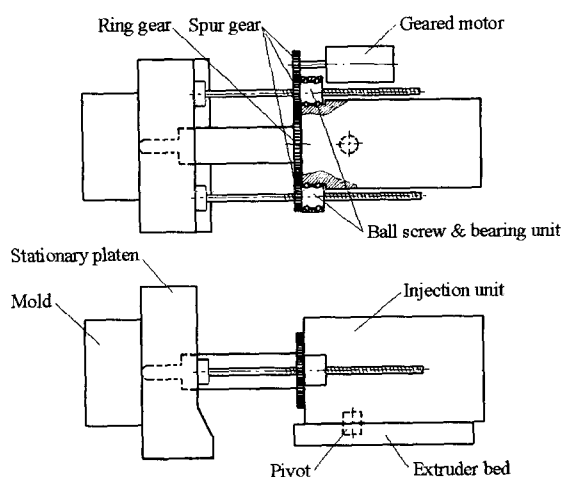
Existing nozzle contact mechanism preventing stationary platen bending
